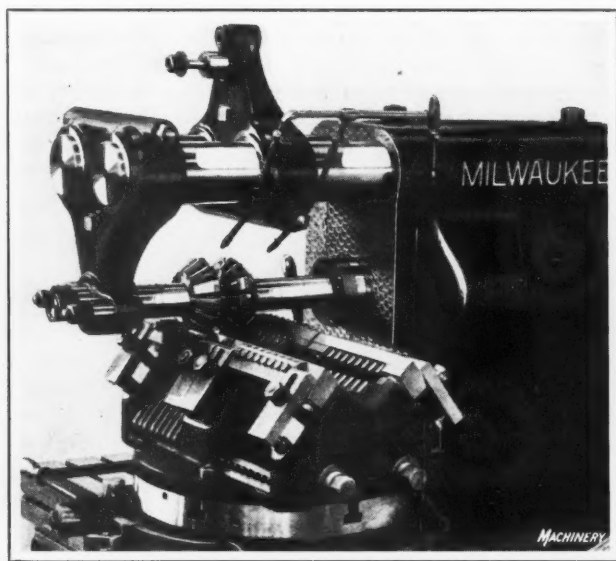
Form Milling Operation requiring Unusual Design of Fixture
